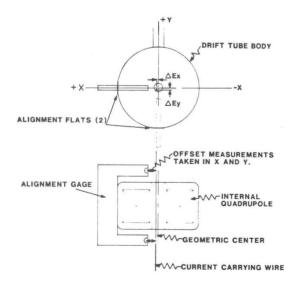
Alignment jig for measuring magnetic-axis offset.
